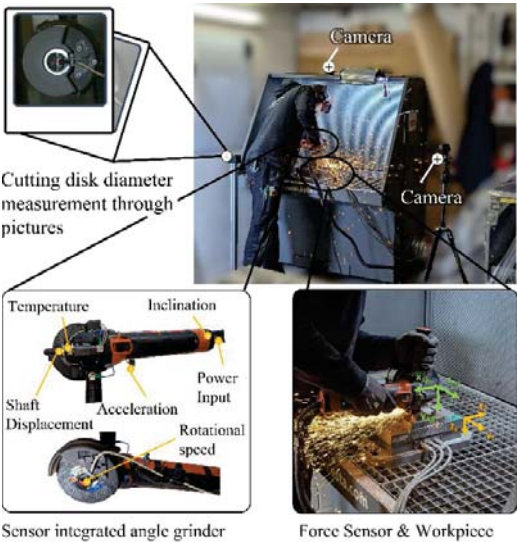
Overall testing hardware. Top left: picture of angle grinder cutting wheel while it is running. Used for diameter measurements. Top right: extraction hood and work area. Bottom left: Sensor integrated angle grinder. Bottom right: Force sensor and workpiece during test run cutting steel.
